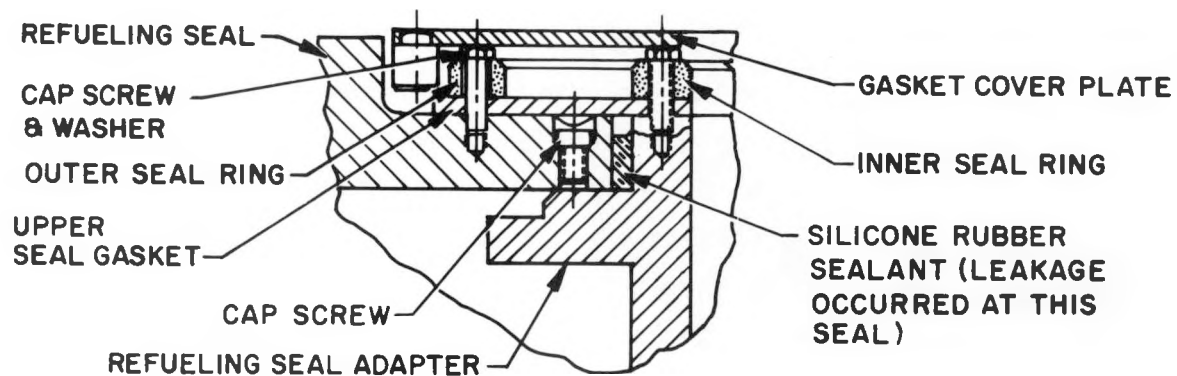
Leaking Seal on Refueling Seal-to-Adapter Joint
